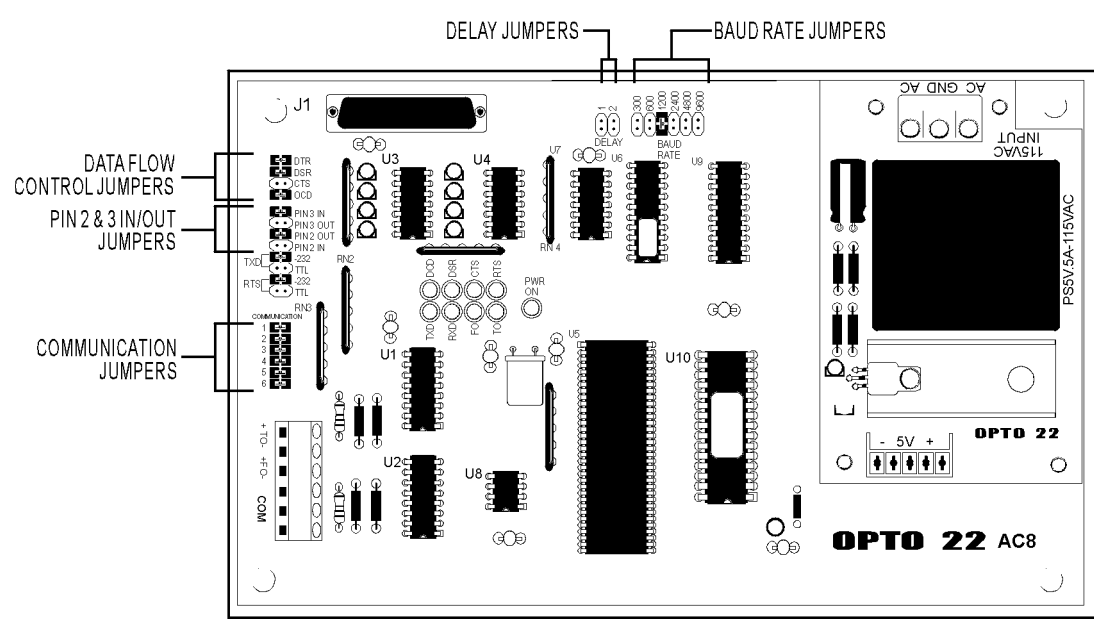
Dimensions and Layout of the AC8 Adapter Card
